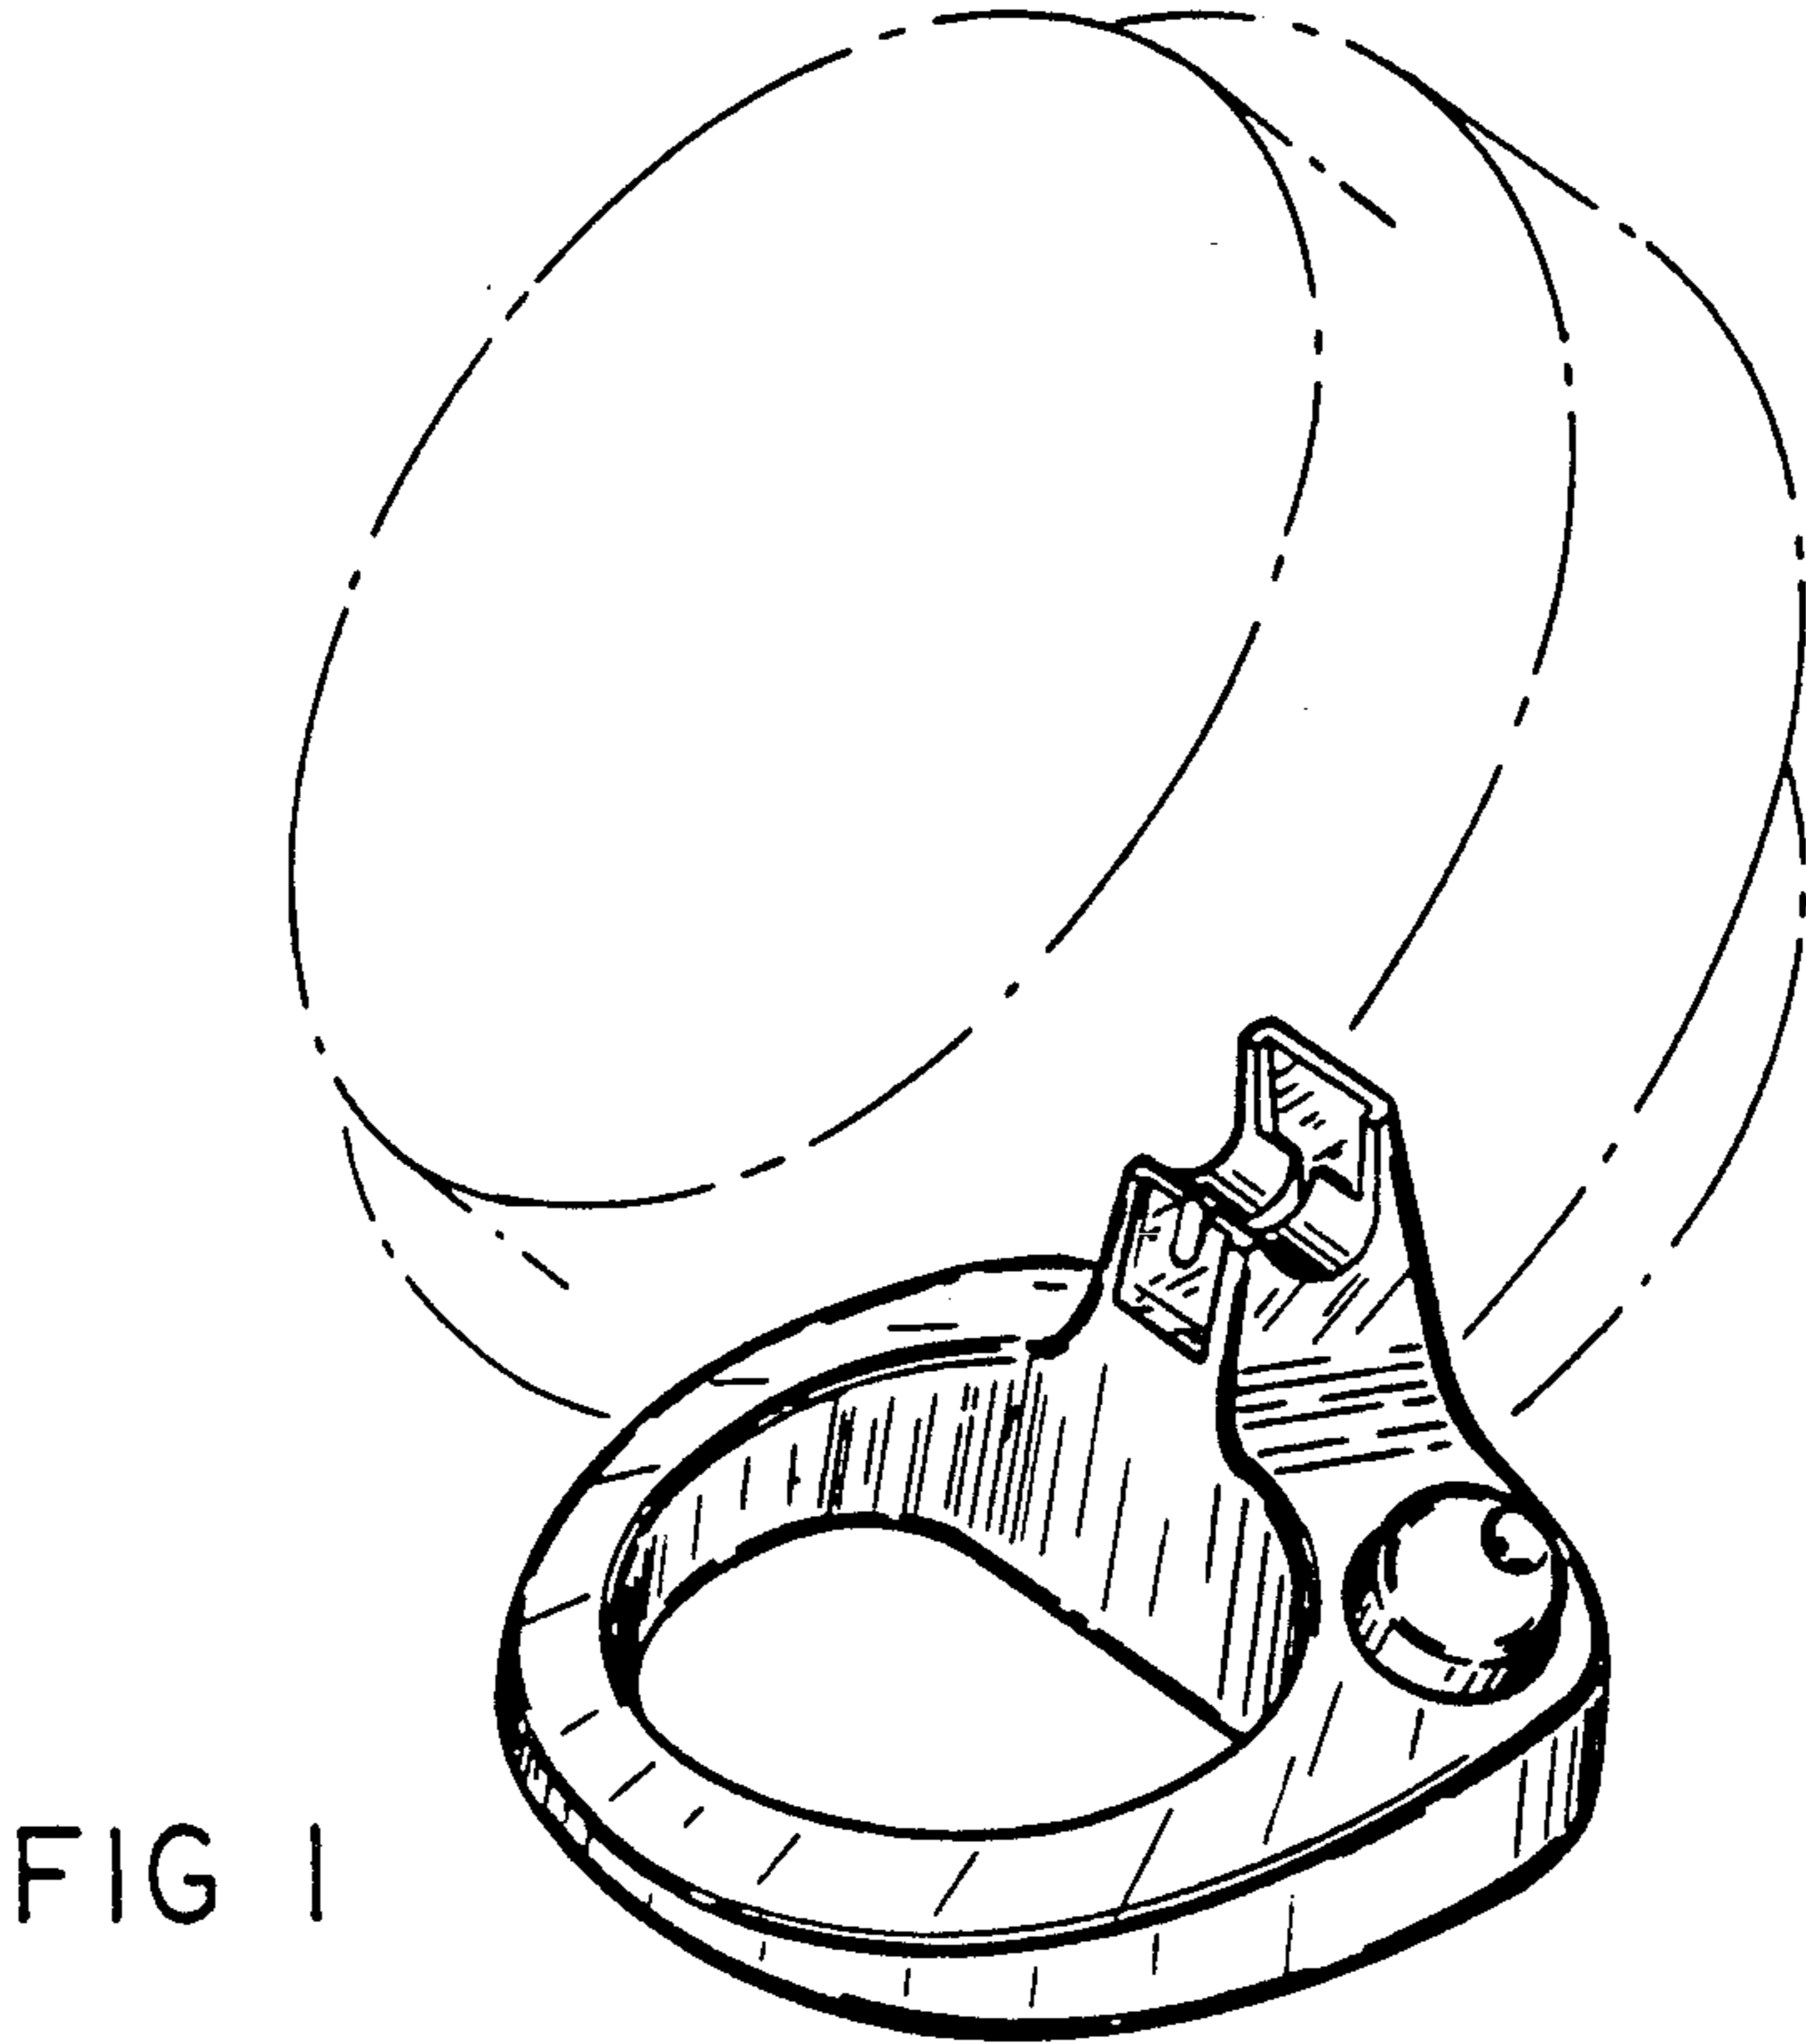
is a front and right side perspective view of a fan support base showing our new design;
